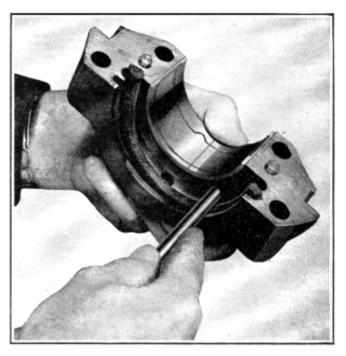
Rolling Rear Bearing Oil Seal into Cap Groove
